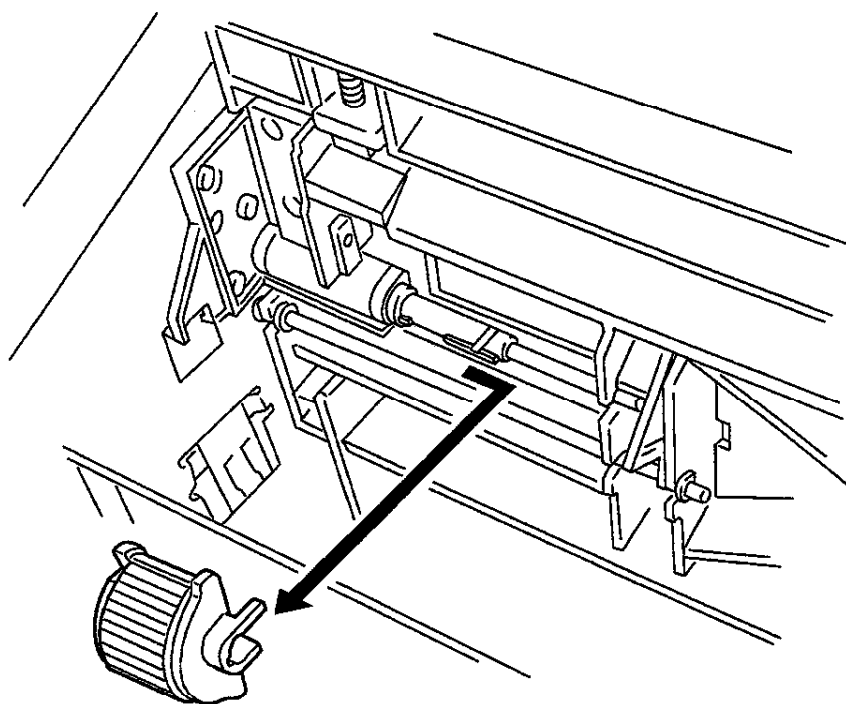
Removing the 500 Feed Roll Assembly
